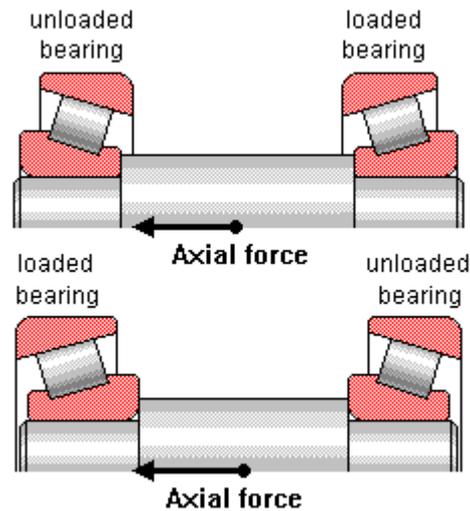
Loaded and unloaded radial-thrust bearings
